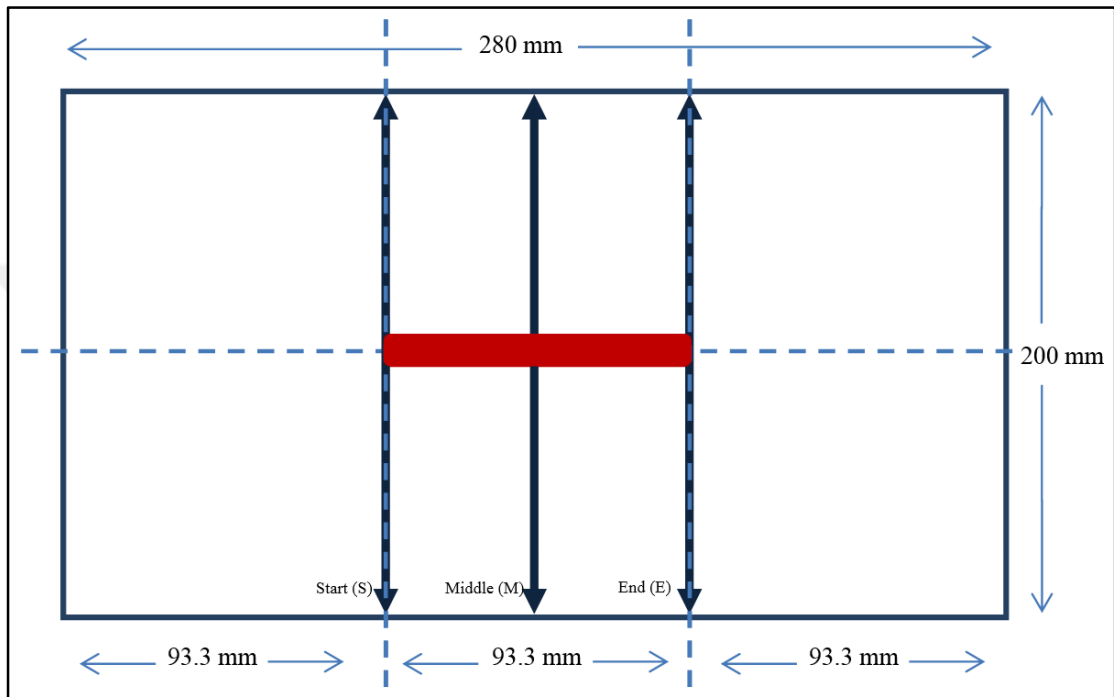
Dimensional illustration of plate and weld groove and ultrasonic wave velocity measurement points as start, middle and end sections
